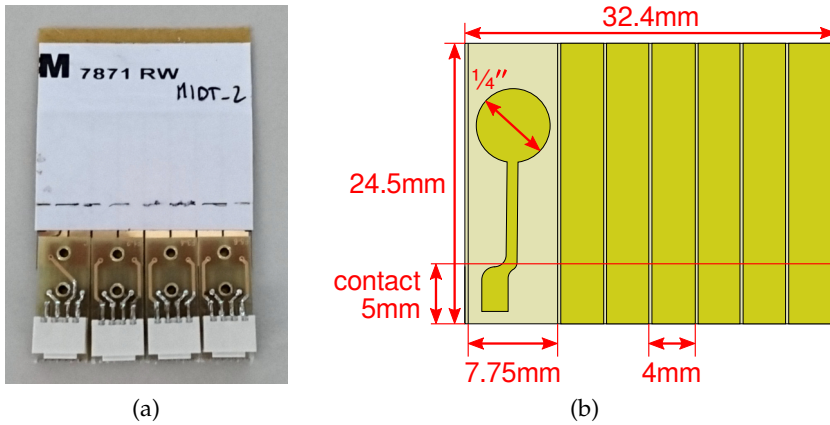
Multi-element IDT: (a) picture; (b) dimensional drawing.
